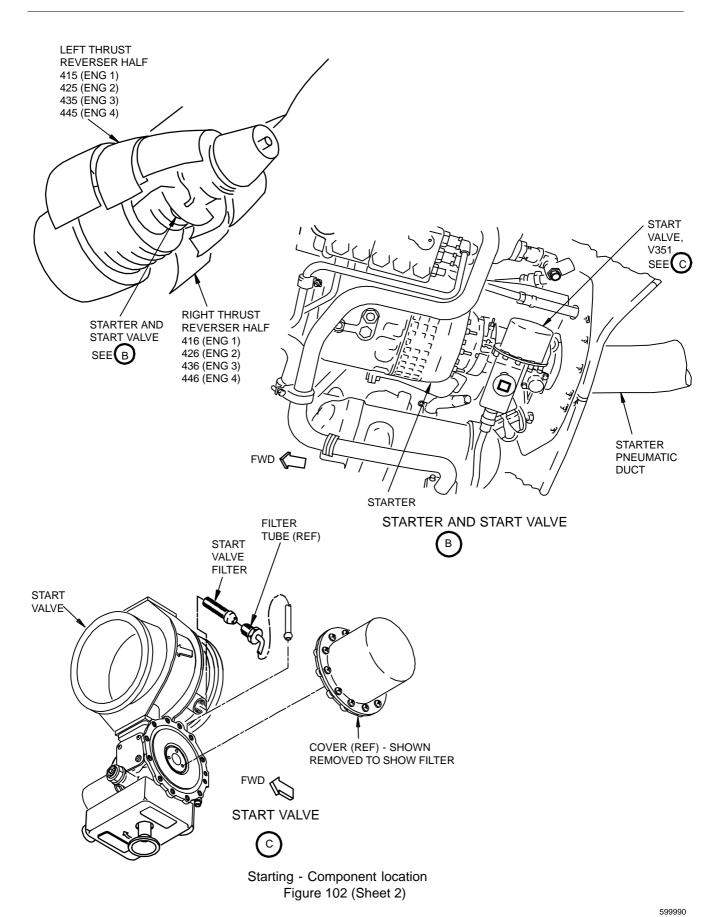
80-00 Starting Component Location Fig. 102 (Sheet 2)
